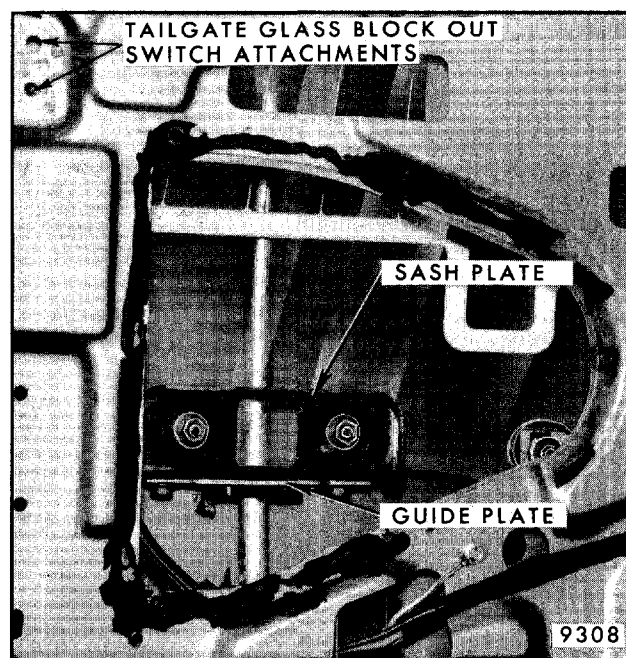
Tailgate Window Guide Plate Attachments
